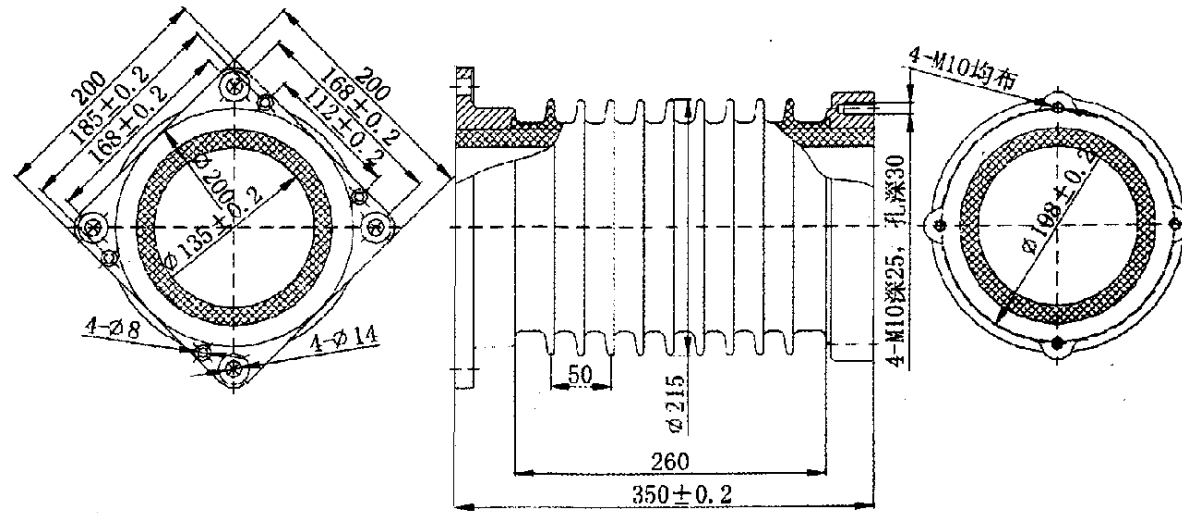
25kV vacuum circuit breaker (horizontal support) composite bushing
